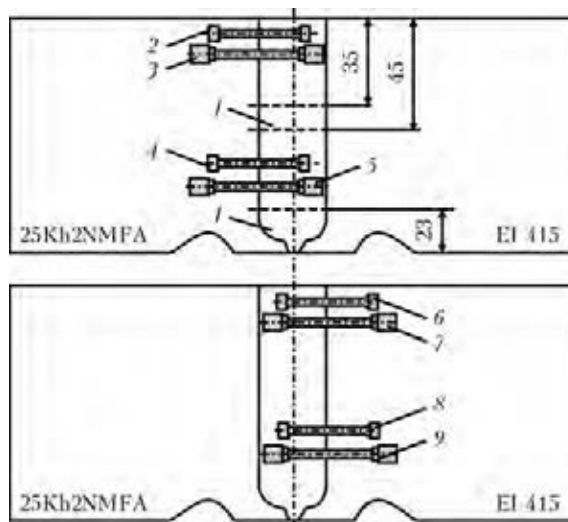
Location of weld zones by cross-sectional height of combined welded joint, and schematic of cutting out samples for tensile testing (for designations see the text)
